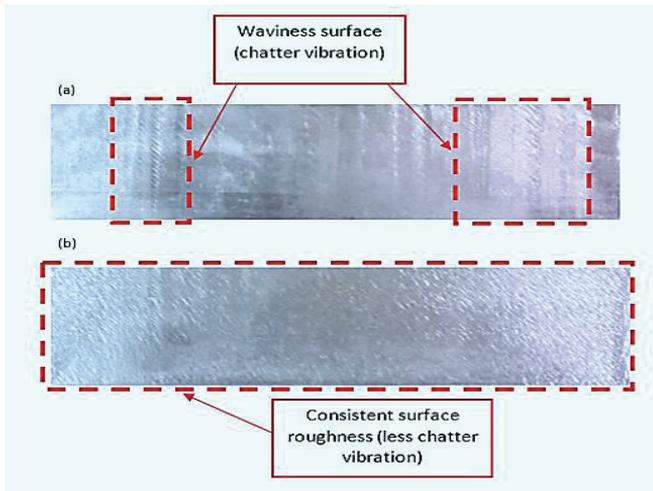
Machined surface condition for (a) Single cutter (b) Twin cutter technique
